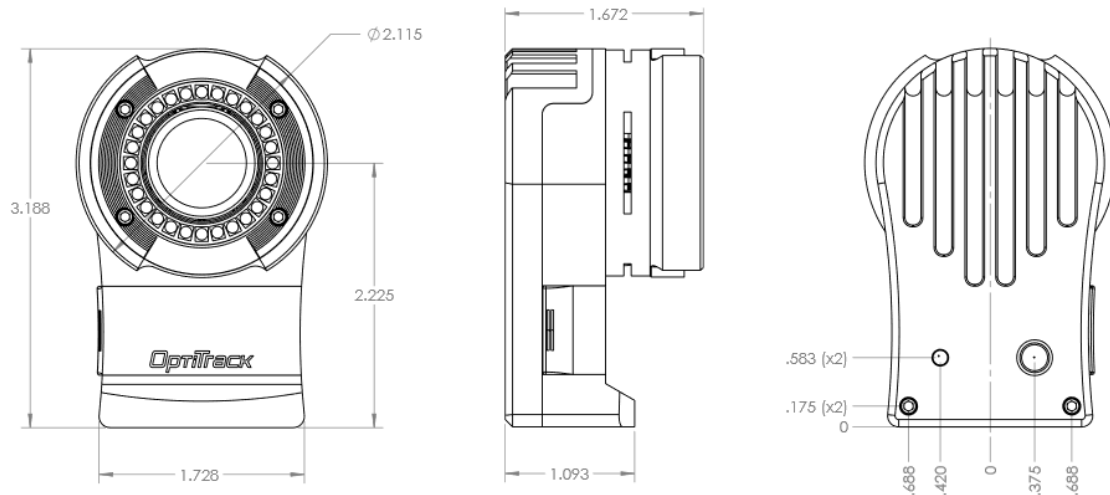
Technical drawing OptiTrack Flex 13 from [11].
